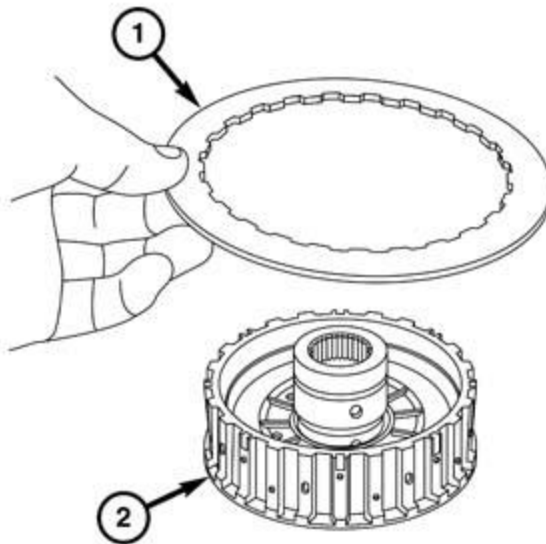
Clutch Hub, C-Clutch Shaft & O-Rings
